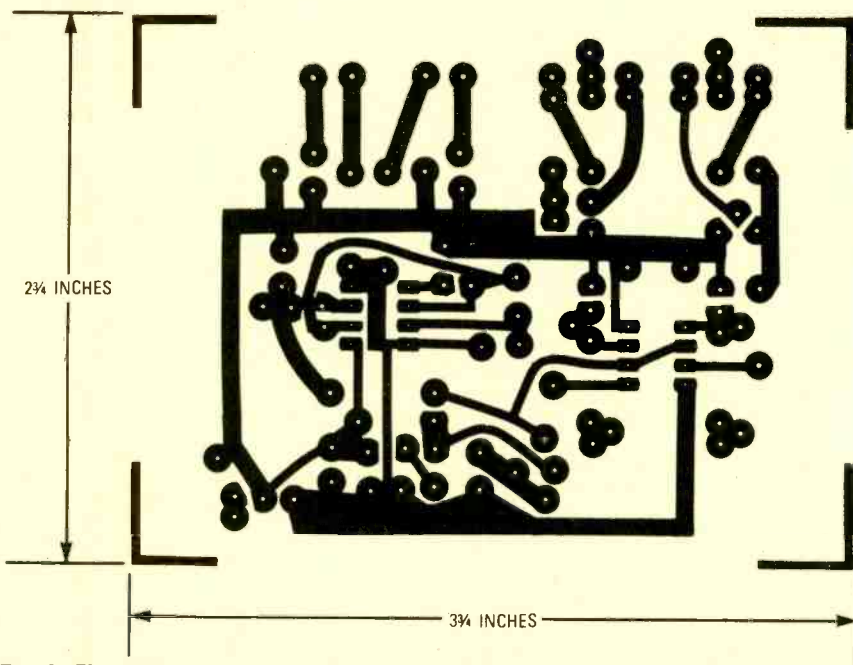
The author's prototype of the Train and Slot Car Controller can be assembled on printed-circuit board produced from this layout. You can etch your own board or purchase one from the supplier listed in the Parts List.
